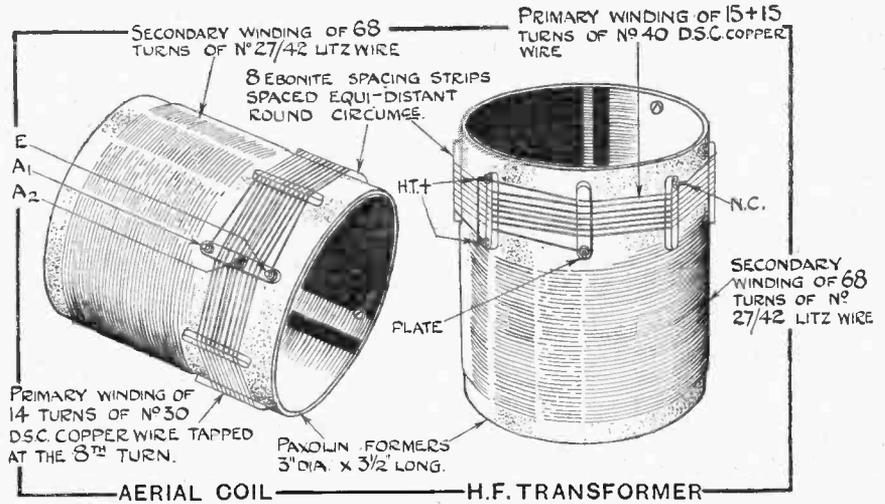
Details of the aerial-grid and intervalve high-frequency transformer windings.
